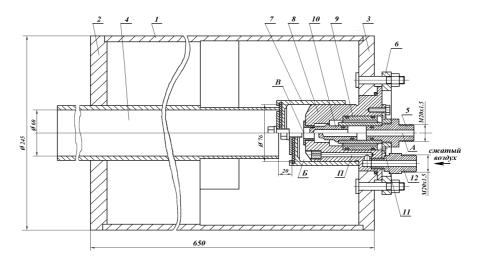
Sketch of pneumopulse generator PG – 25/40. 1 – prechamber; 2 – flange; 3 – exhaust tube; 5 – control tube; 6 – flange; 7 – close valve; 8 – body; 9 – insert; 10 – control valve; 11 – cover; 12 – input tube.
